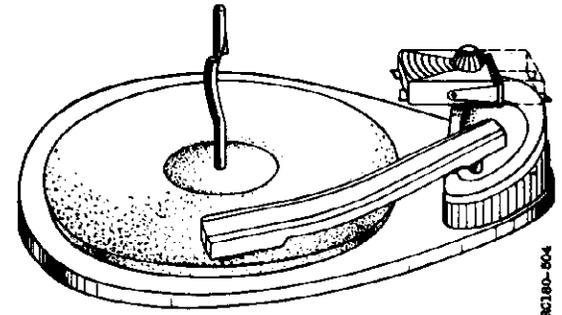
B - Record Changer RC180, Top View Showing Pear-Shaped Pan.
